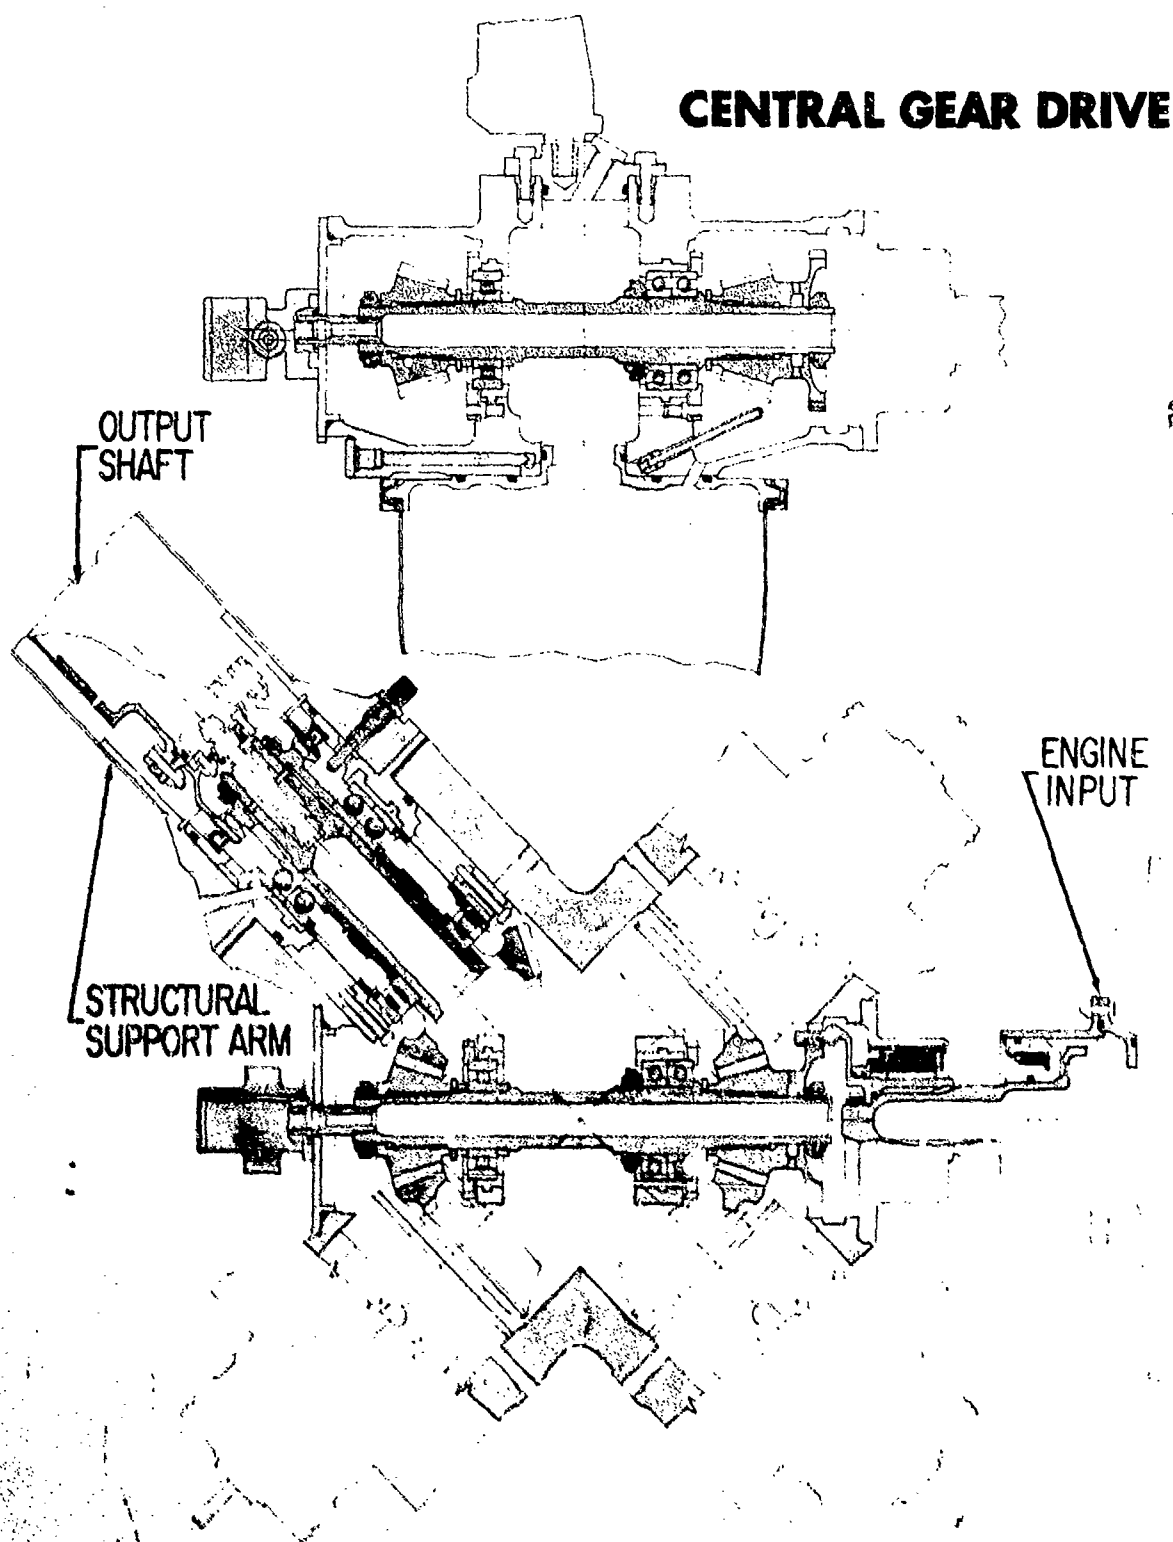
CUTAWAY VIEW OF MAIN GEAR BOX
